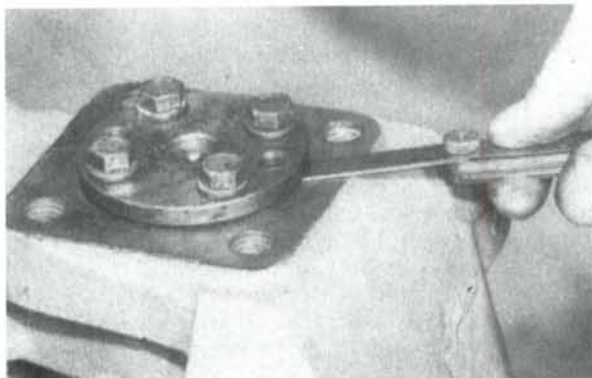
To set bearing pin preload, use a feeler gage to measure gap between bearing pin flange and stub axle housing. Refer to text.
